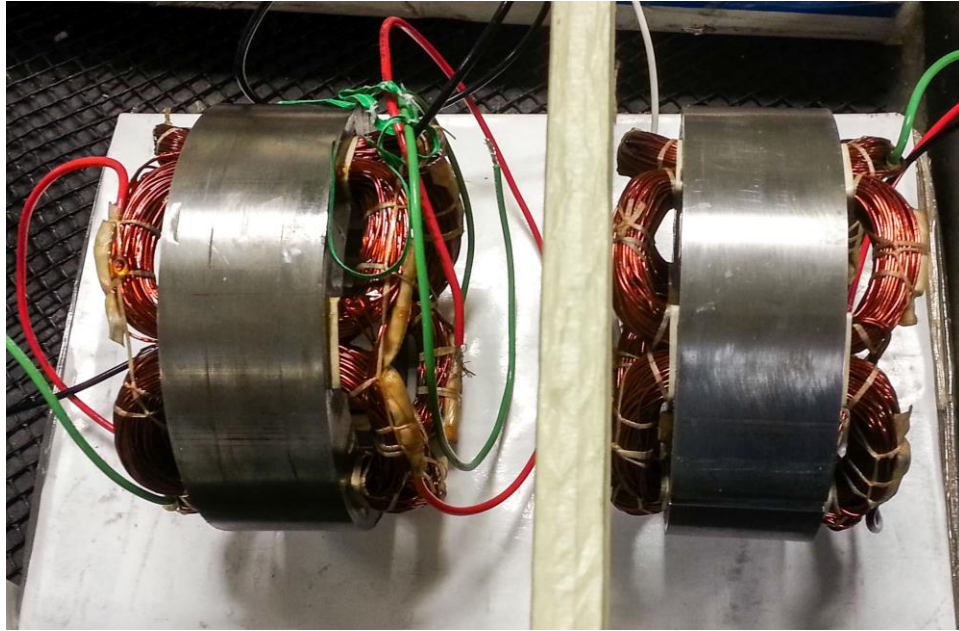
Fabricated two stators of the proof-of-concept prototype machine.
